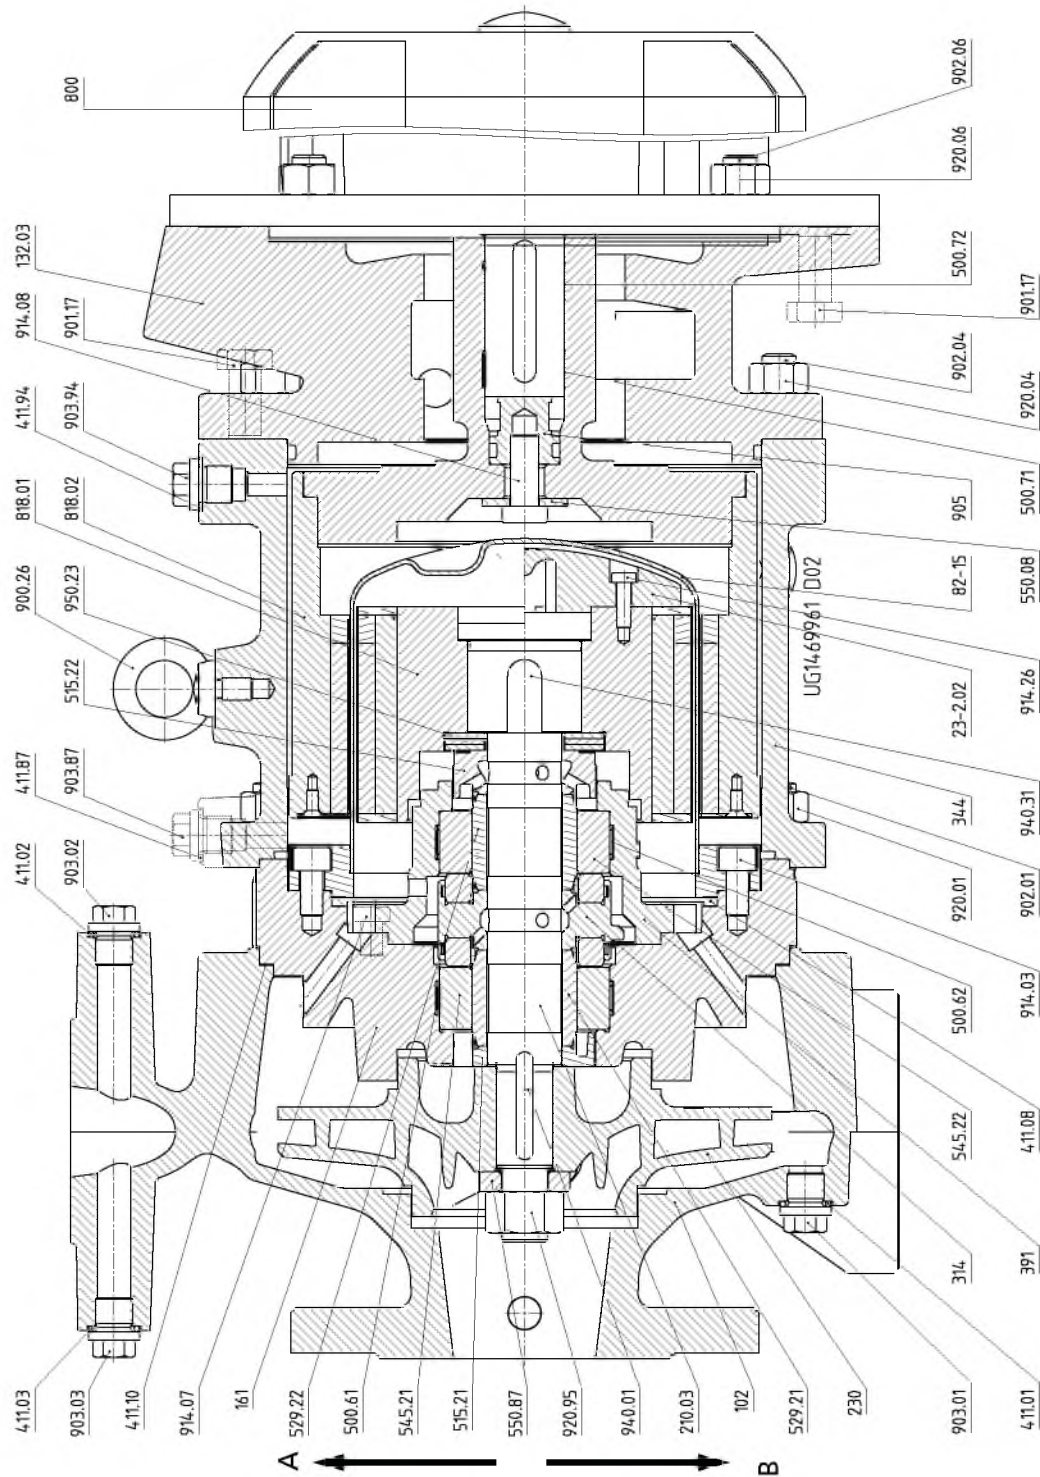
General assembly drawing of model with clamped cover and without intermediate piece
